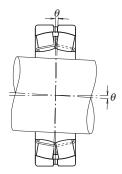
Permissible Misalignment of Spherical Roller Bearings
